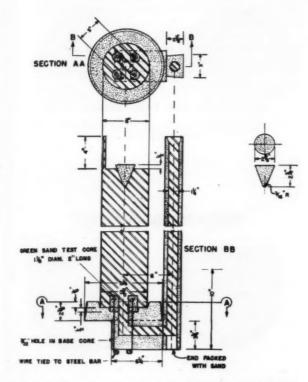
Sketch shows metal penetration test casting for green sand cores.
